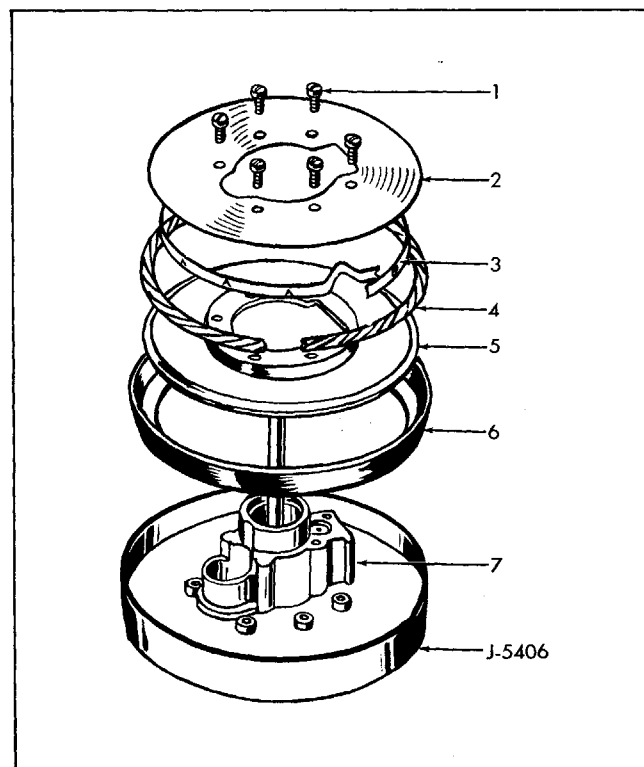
Replacement of Packing and Plate in Rear Piston Plate
